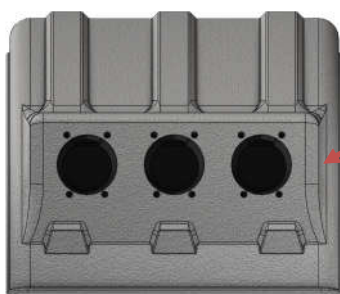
DRIVER SIDE WIRING HOLE LOCATION.
